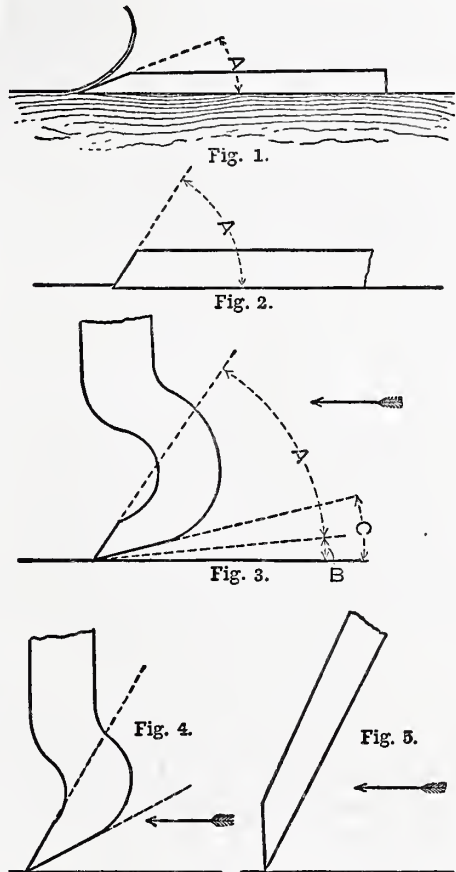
Wood-working Chisel. Fig. 2.—Angle necessary for Cutting Iron. Fig. 3.—Common Form of Tool for Planing or Turning Iron. Fig. 4.—Tool Badly Formed for Planing or Turning Iron. Fig. 5.—Diagram to Illustrate Improper Presentation of Chisel.
